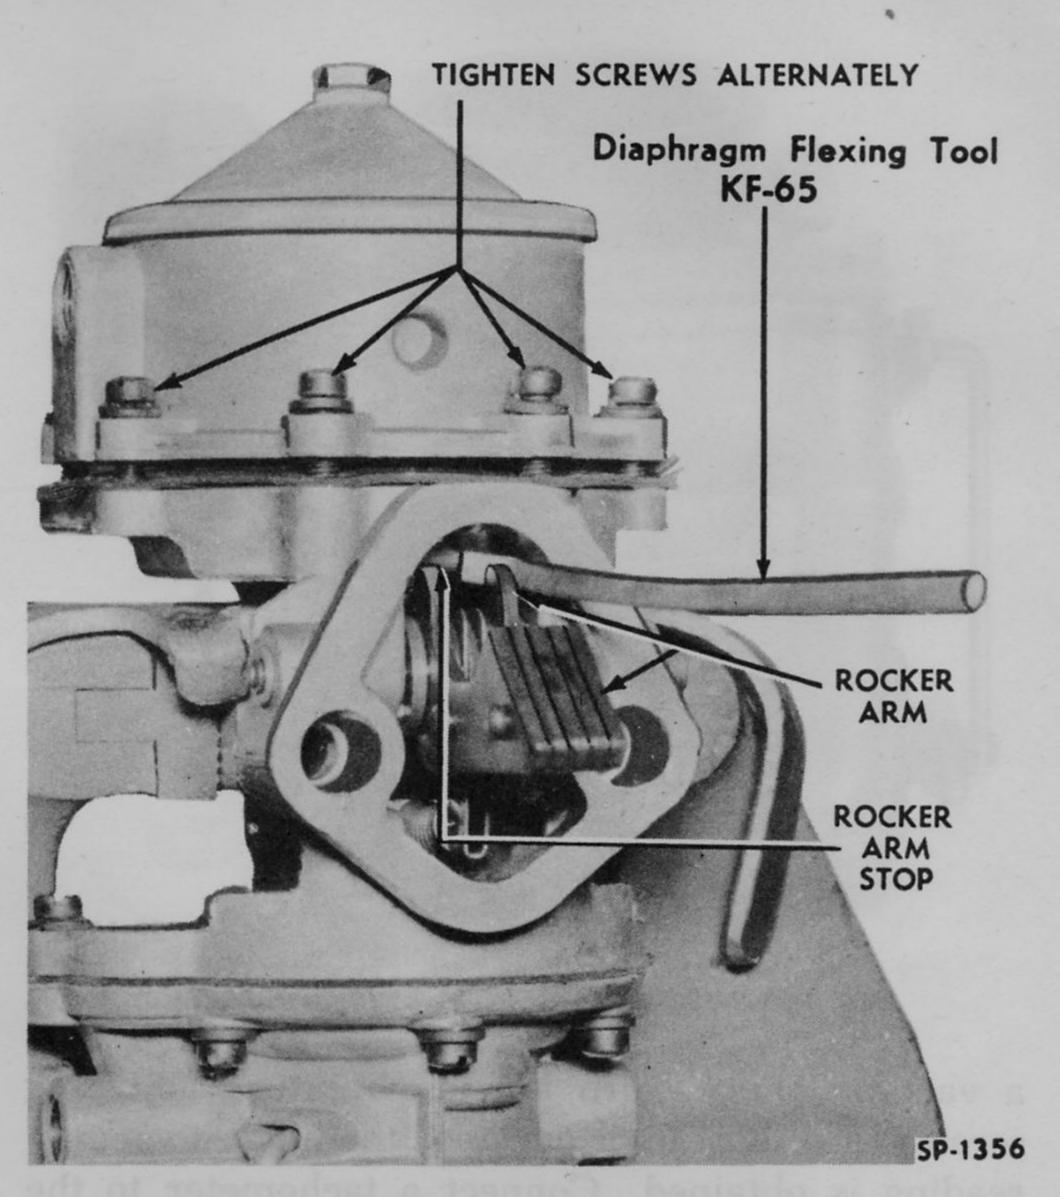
Using Flexing Tool to Install Vacuum Cover
